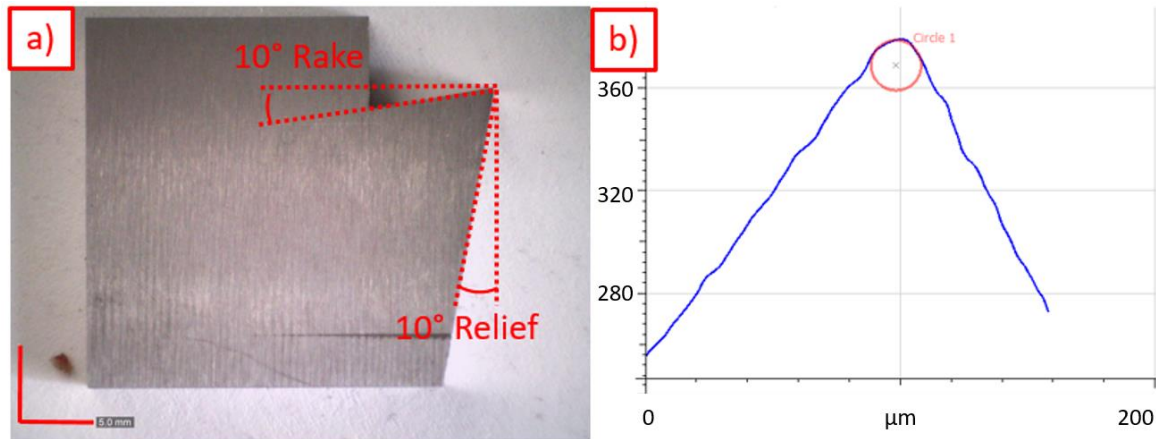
High-speed cutting insert example a) Side view of cutting insert b) Measurement example of cutting edge radius
